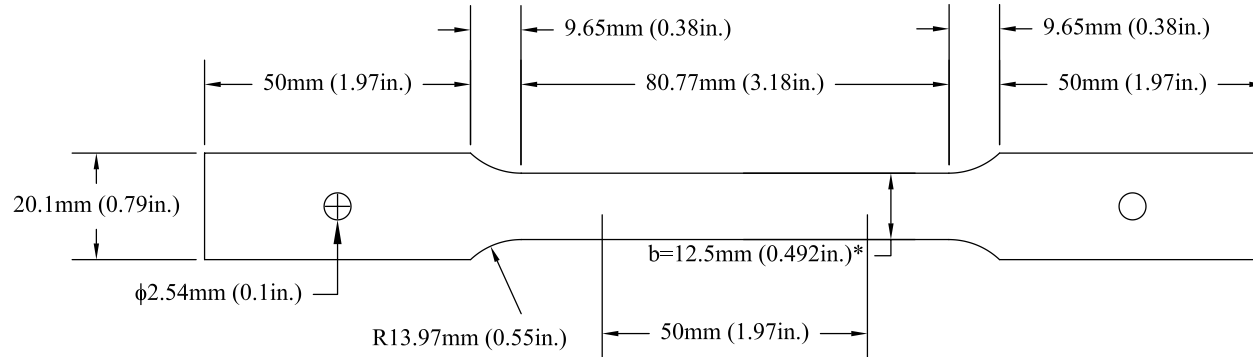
Tensile coupon dimensions. In order to machine the specimens the steel sheet is connected to a CNC machine; the holes in the specimen are due to the two bolts that connect the sheet to the machine. *b measurements are in Table C.1.
